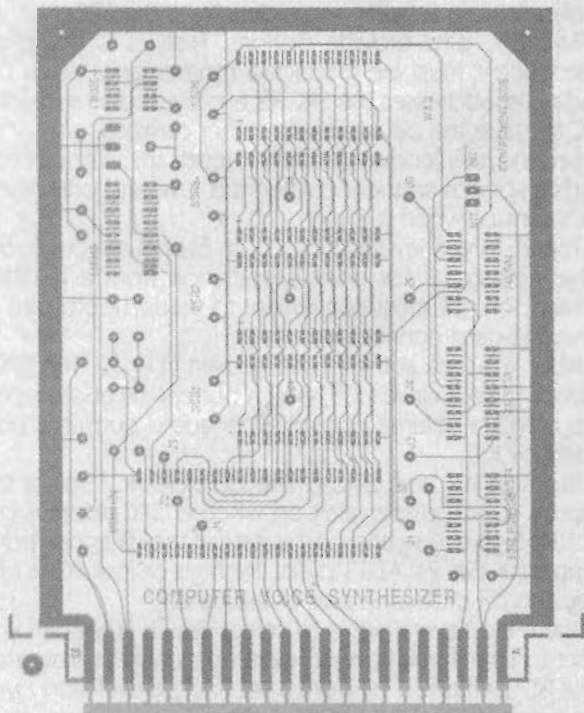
PARTS LAYOUT: Note that six jumpers must be installed on the component side of the board before installing the IC sockets. (Sockets mount over five of the six jumpers.)
